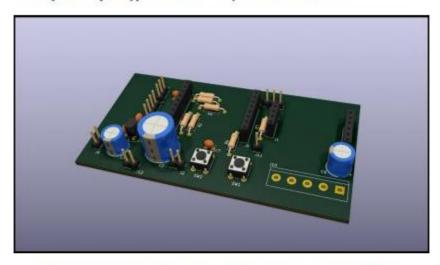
3D PCB prototype of the developed monitoring system's measurement node
